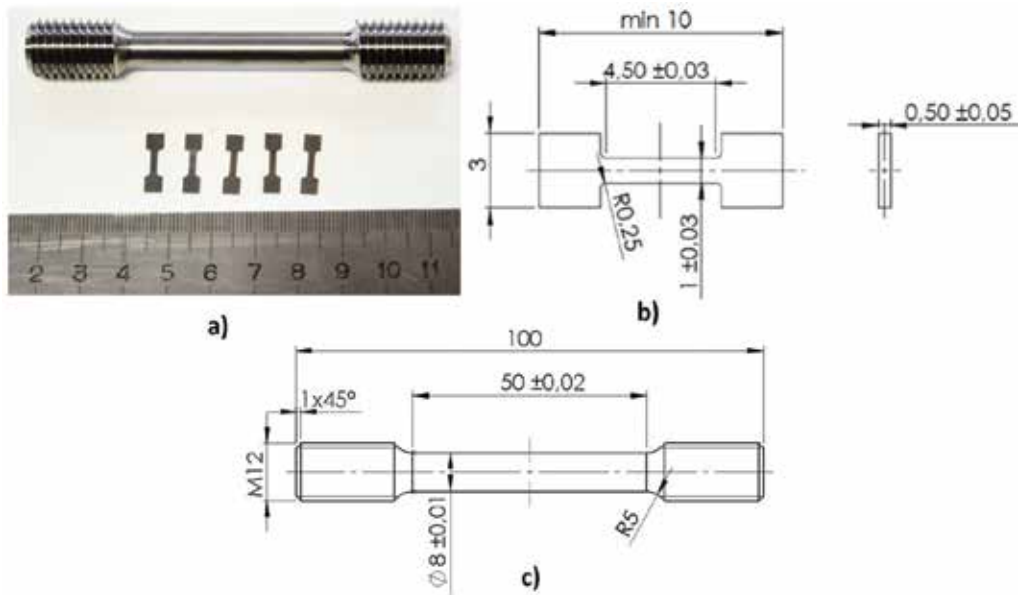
Tensile test specimen geometries. (a) Comparison of the standard and miniature tensile test specimens. (b) Dimensions of mini tensile test (M-TT) specimen. (c) Standard size specimen.
